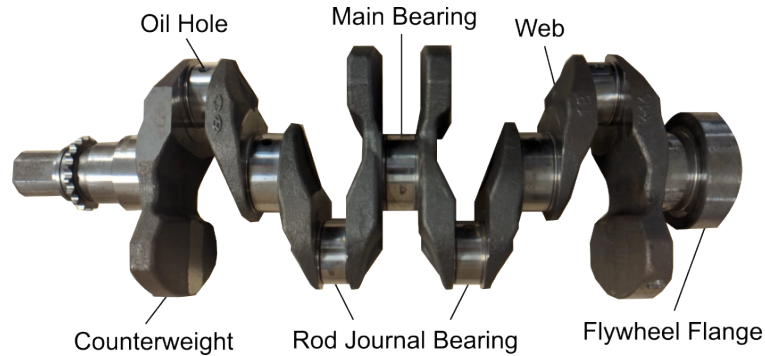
4-cylinder inline crankshaft with the major parts labelled
